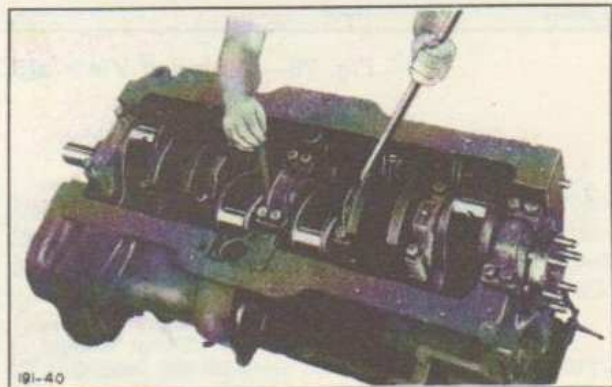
Checking Thrust Washer Clearance with Feeler Gage
